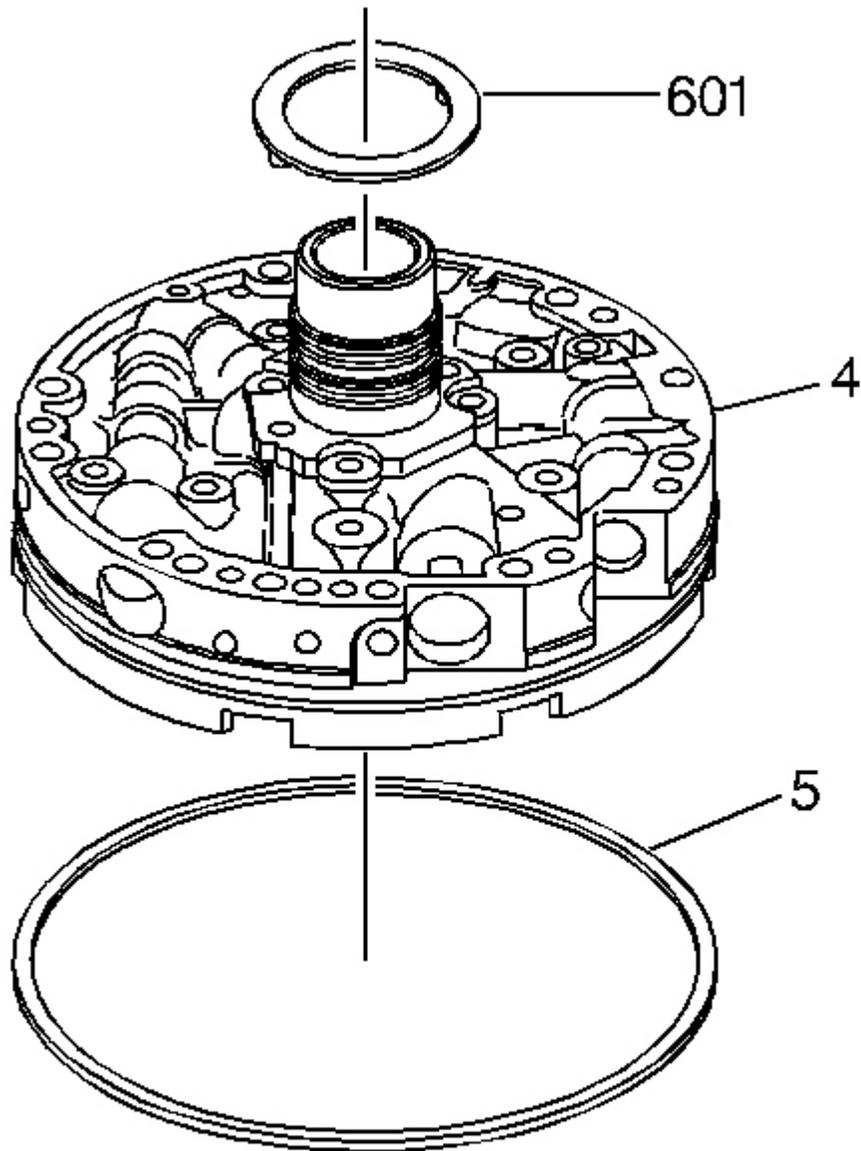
Thrust (Pump To Drum) Washer & Oil (Pump To Case) Seal
